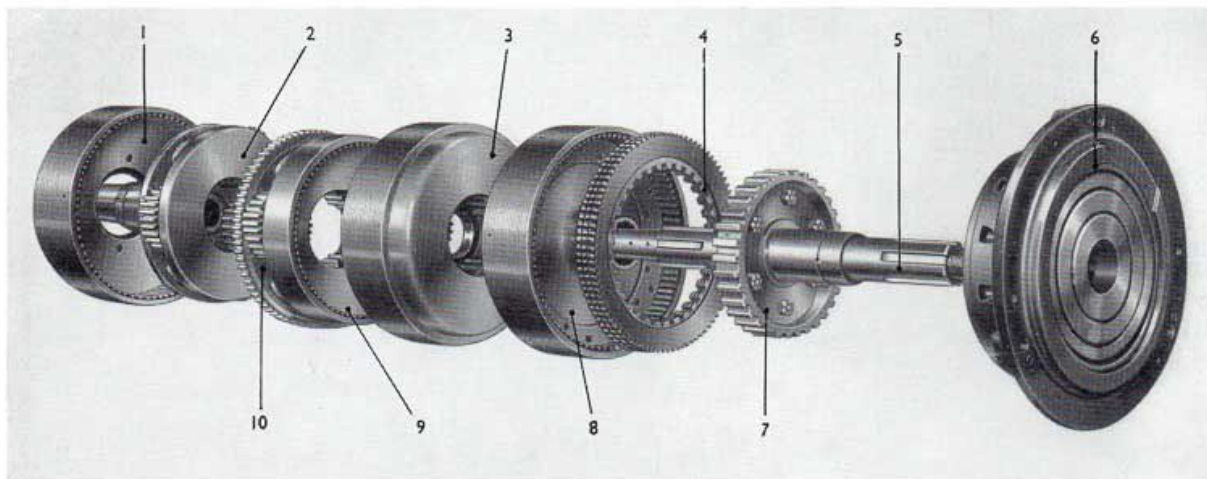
EXPLODED VIEW OF RUNNING GEAR (VIEWED FROM INPUT END).
